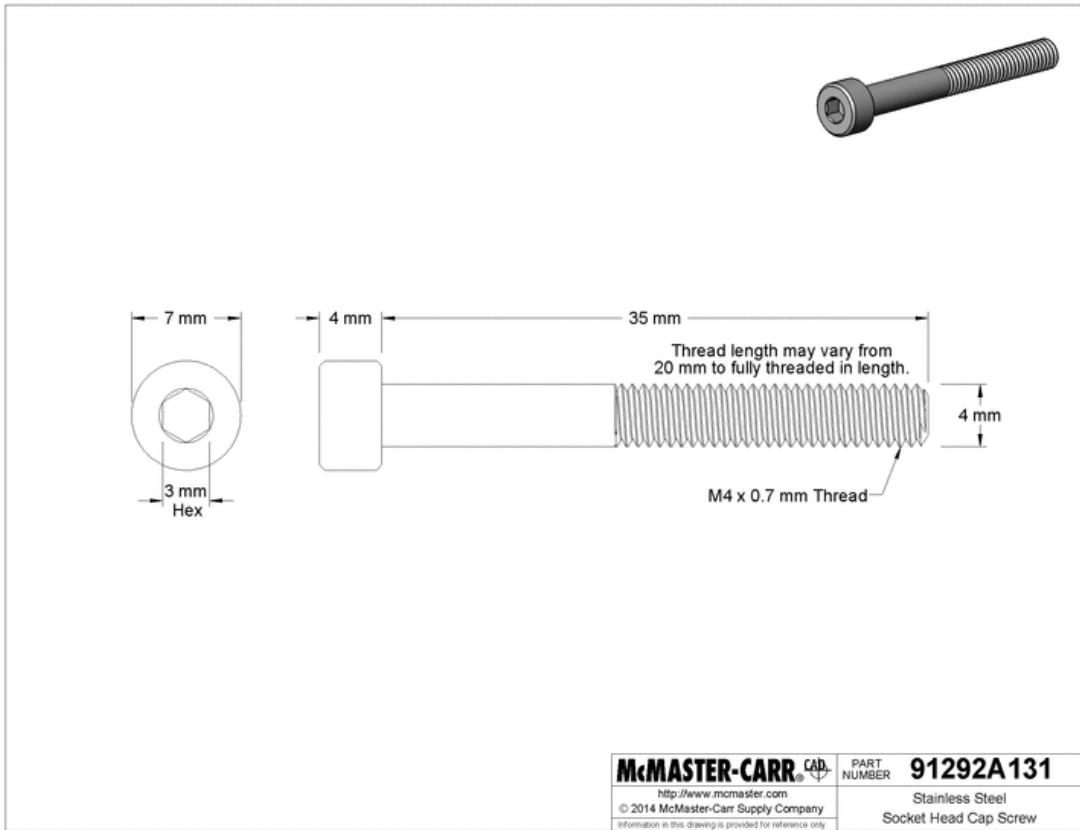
Engineering drawing of the M4 Socket Head Screws for securing the spring assembly to the platform
